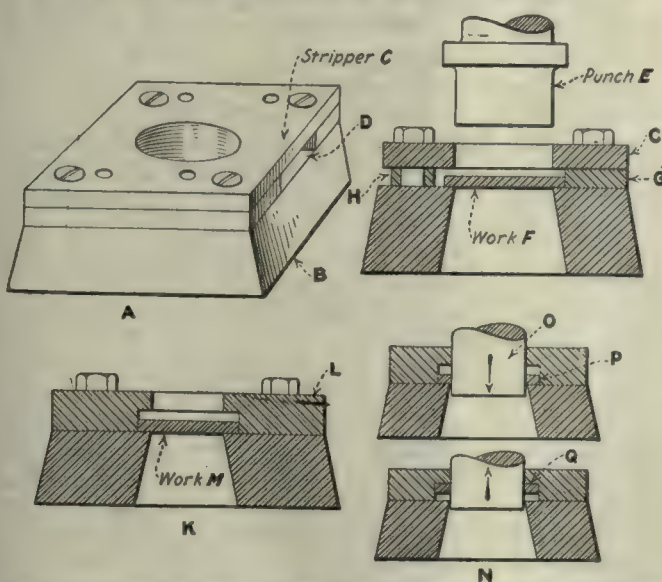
STRIPPER PLATES USED ON BLANKING DIES
